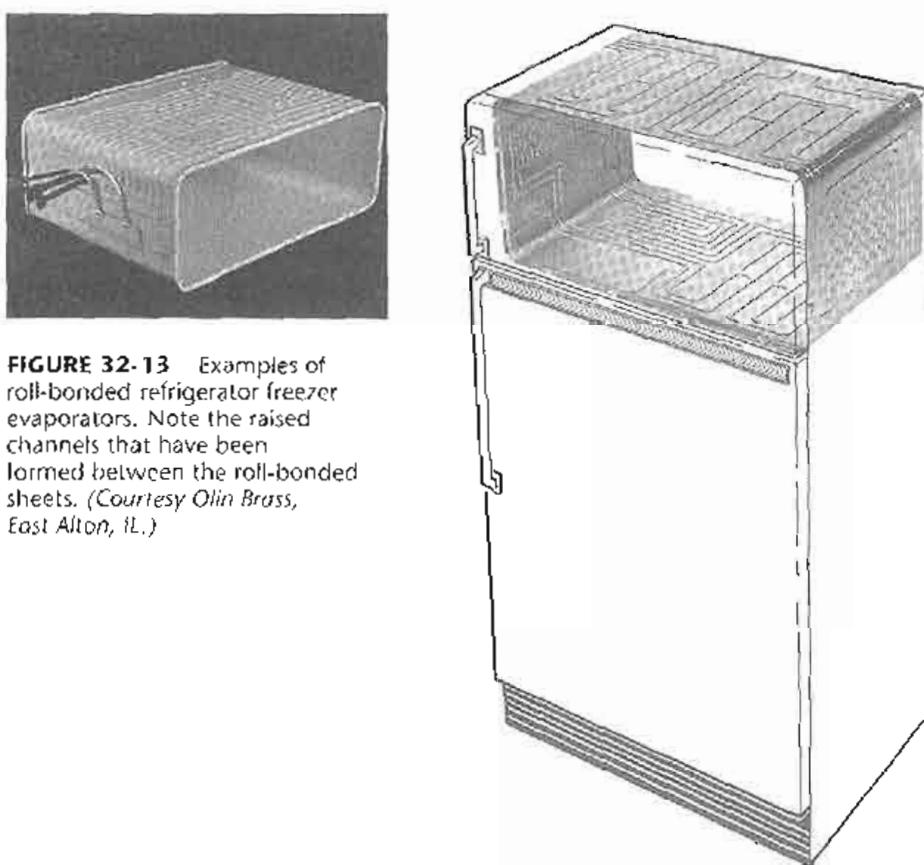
Examples of roll-bonded refrigerator freezer evaporators. Note the raised channels that have been formed between the roll-bonded sheets. (Courtesy Olin Brass, East Alton, IL.)
